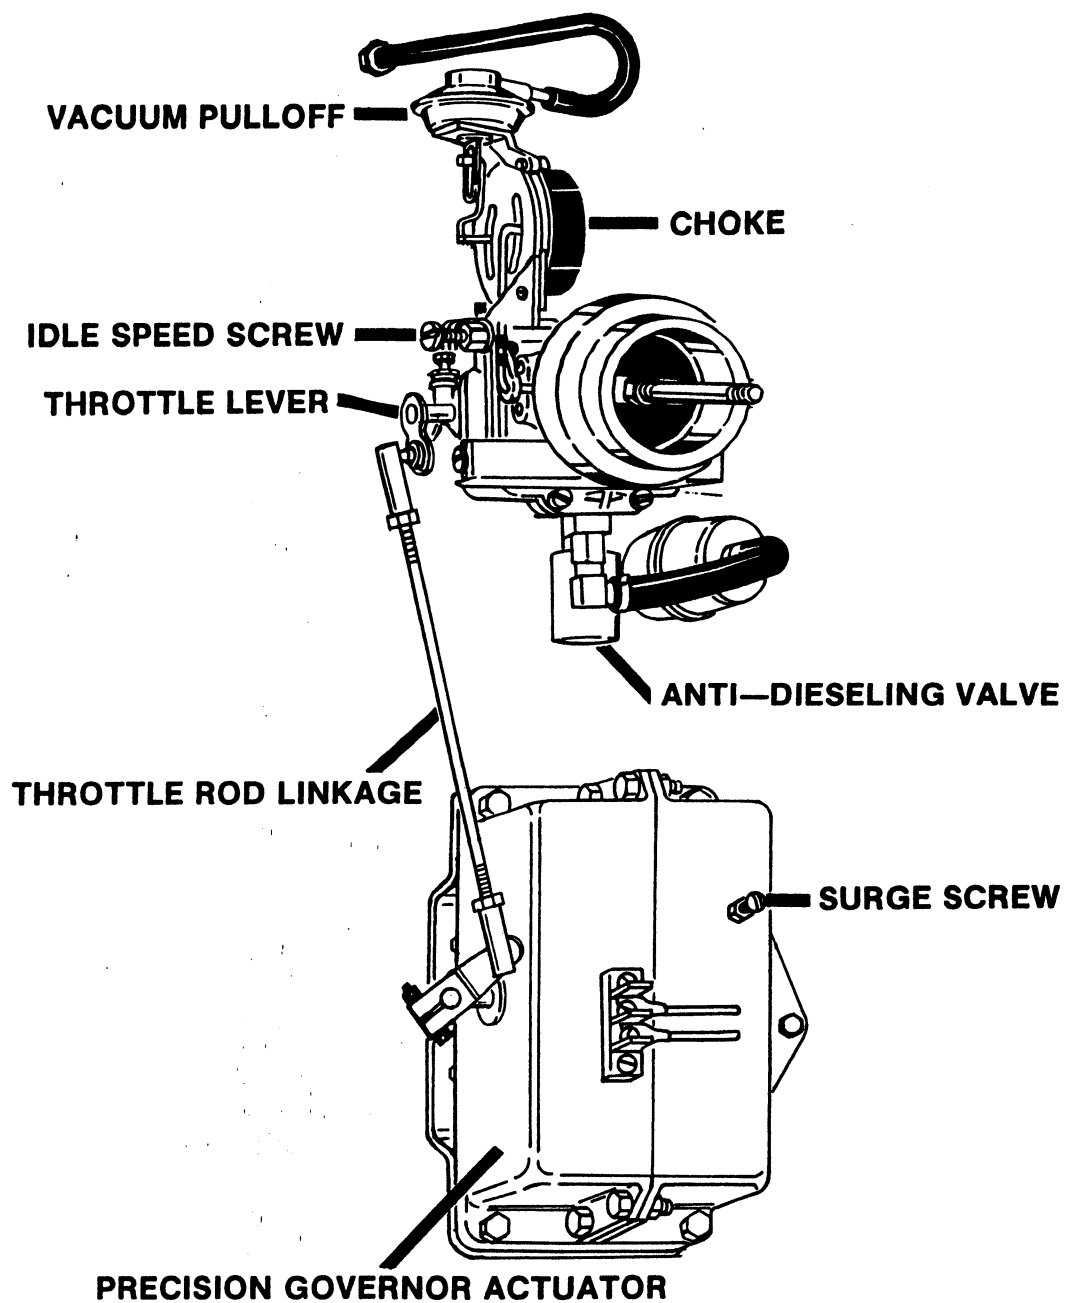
Throttle Checks and Adjustments (LSG-423).
